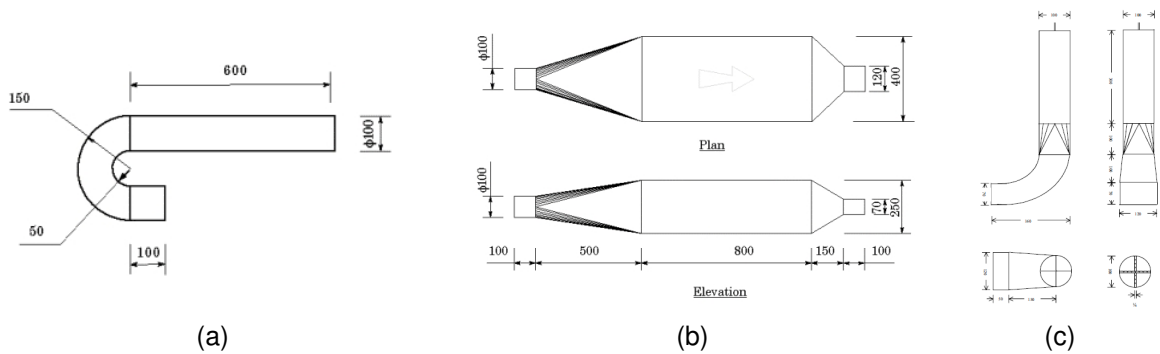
Dimensions (in *mm*) of the PWT used to be used in the present work: (a) Extension inlet duct; (b) Device in it self; (c) Modified outlet.
